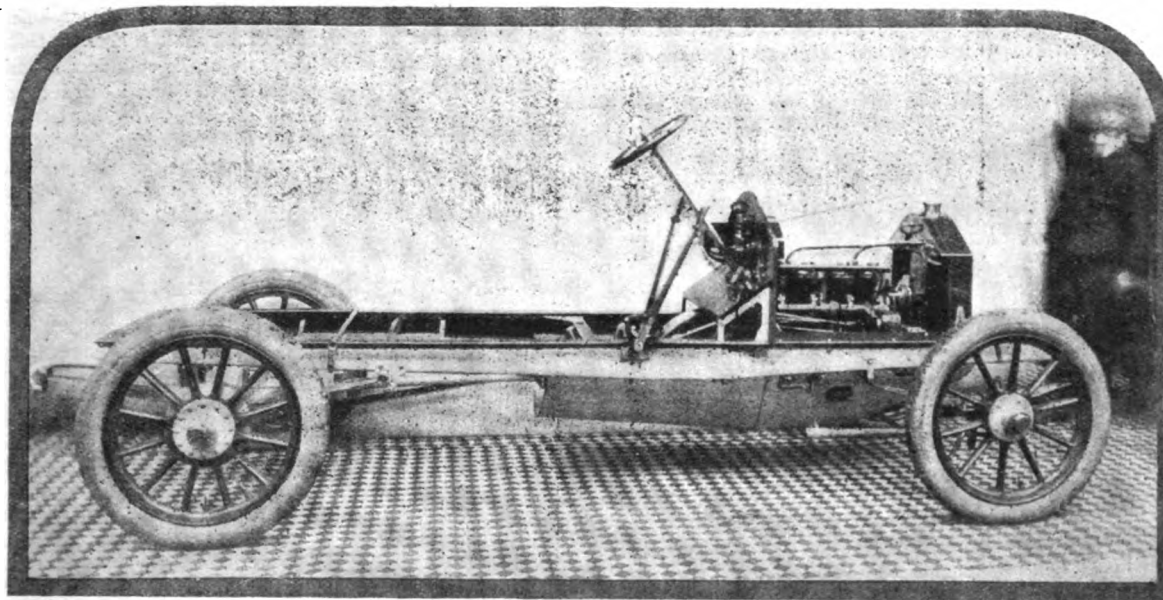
Chassis of Vivinus 16-20-h.p. Car.
